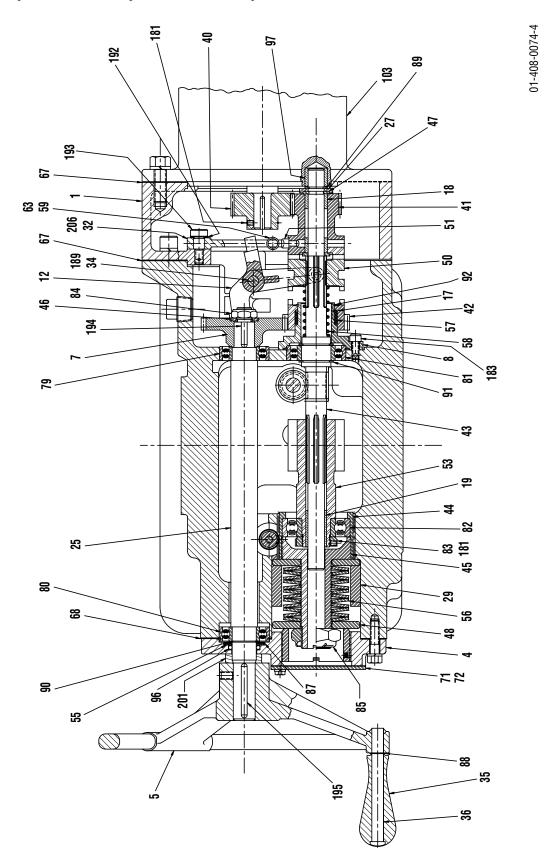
SMB-0 through SMB-4 and 4T Parts Diagram – Drive Sleeve Side View
